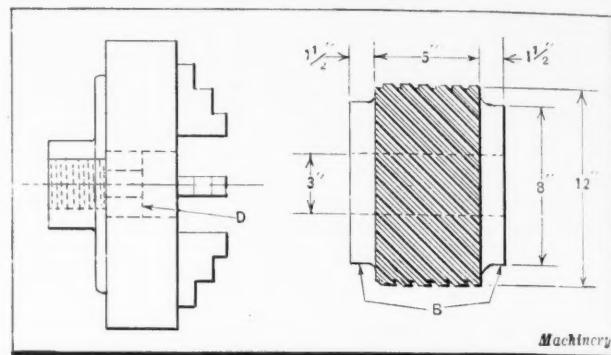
(Right) Cast-iron Gear Blank; (Left) Chuck used for holding Gear Blank and supporting Boring-bar
